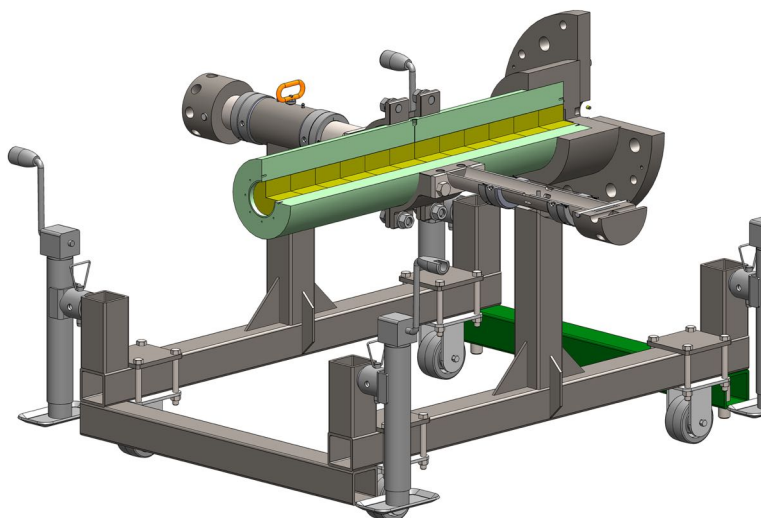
Cross-section view of horizontal tube fully-filled with pellets
